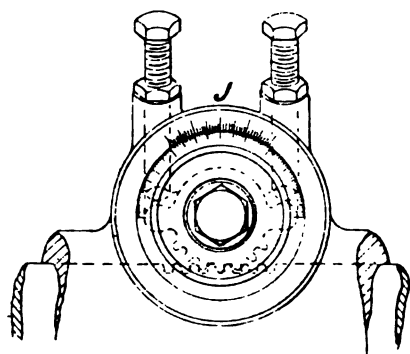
Vernier and Screws for adjusting Cutter Spindle.
